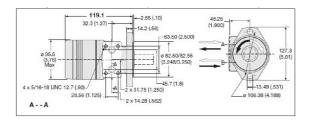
Dimensions of the hydraulic motor for the screw conveyor.
